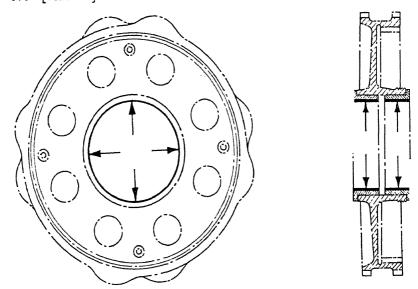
Showing points to check bore diameter of cam sleeve bushes.
